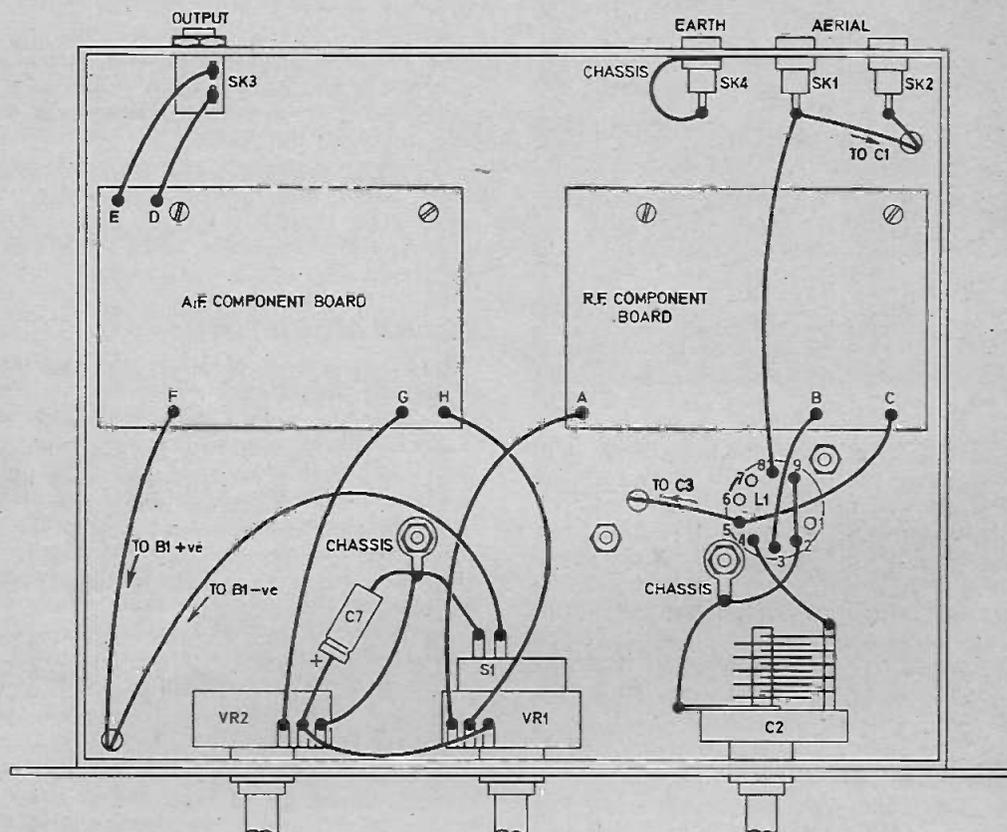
Layout and wiring of parts mounted on the underside of the chassis.
